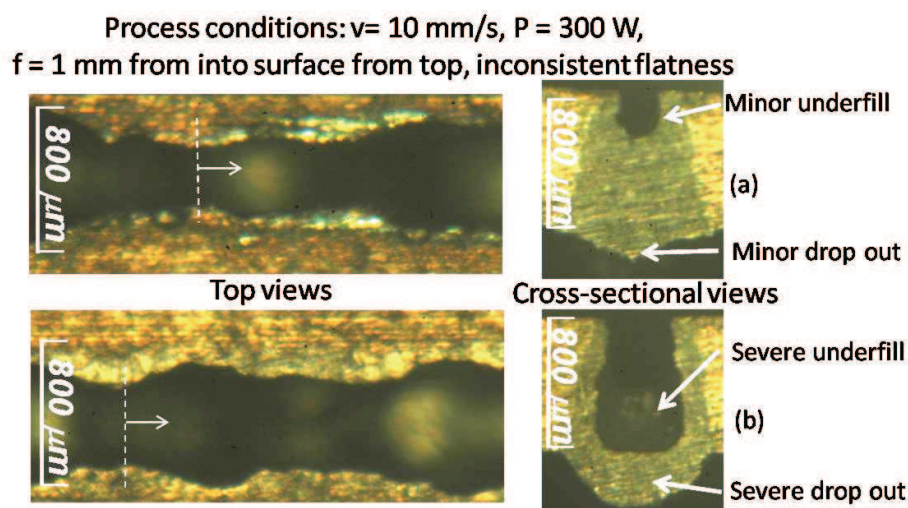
Top and cross-sectional views of insufficient flatness, thin-sheet, full penetration welds
